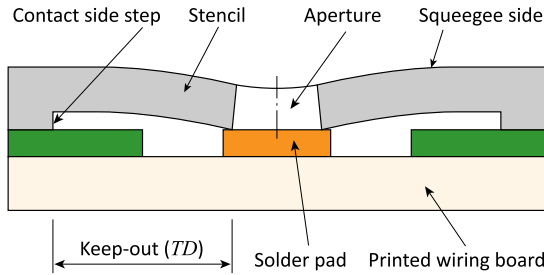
Keep-out distance (TD) necessary for achieving complete stencil contact with the solder pad.
